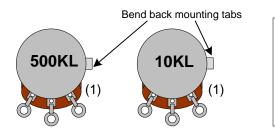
shows where to mount the reverb and dwell pots. When they are mounted, turn their shafts all the way counter-clockwise. (Once you have done this, you can mount the chicken head knobs while pointing to where you want the minimum level setting to be positioned).
